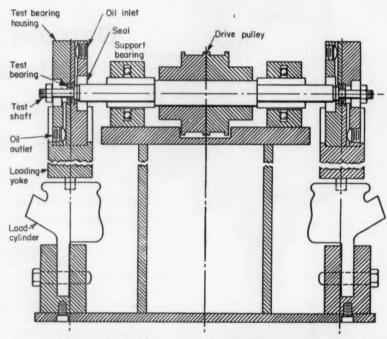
Ball-bearing fatigue-life test assembly in which test bearings have ½-in bore, ½ in OD, and eight 3/32-in balls. Piston area of the load cylinder is 1 sq. in. Hence, actual load transmitted equals applied hydraulic pressure. A motor-overload tripping device stops the motor when an overload (bearing failure) occurs. Sensitivity of the overload device is such that an increase of 1 amp stops the drive motor. Oil mist is applied through bearing housings. Flood lubrication is also provided.
